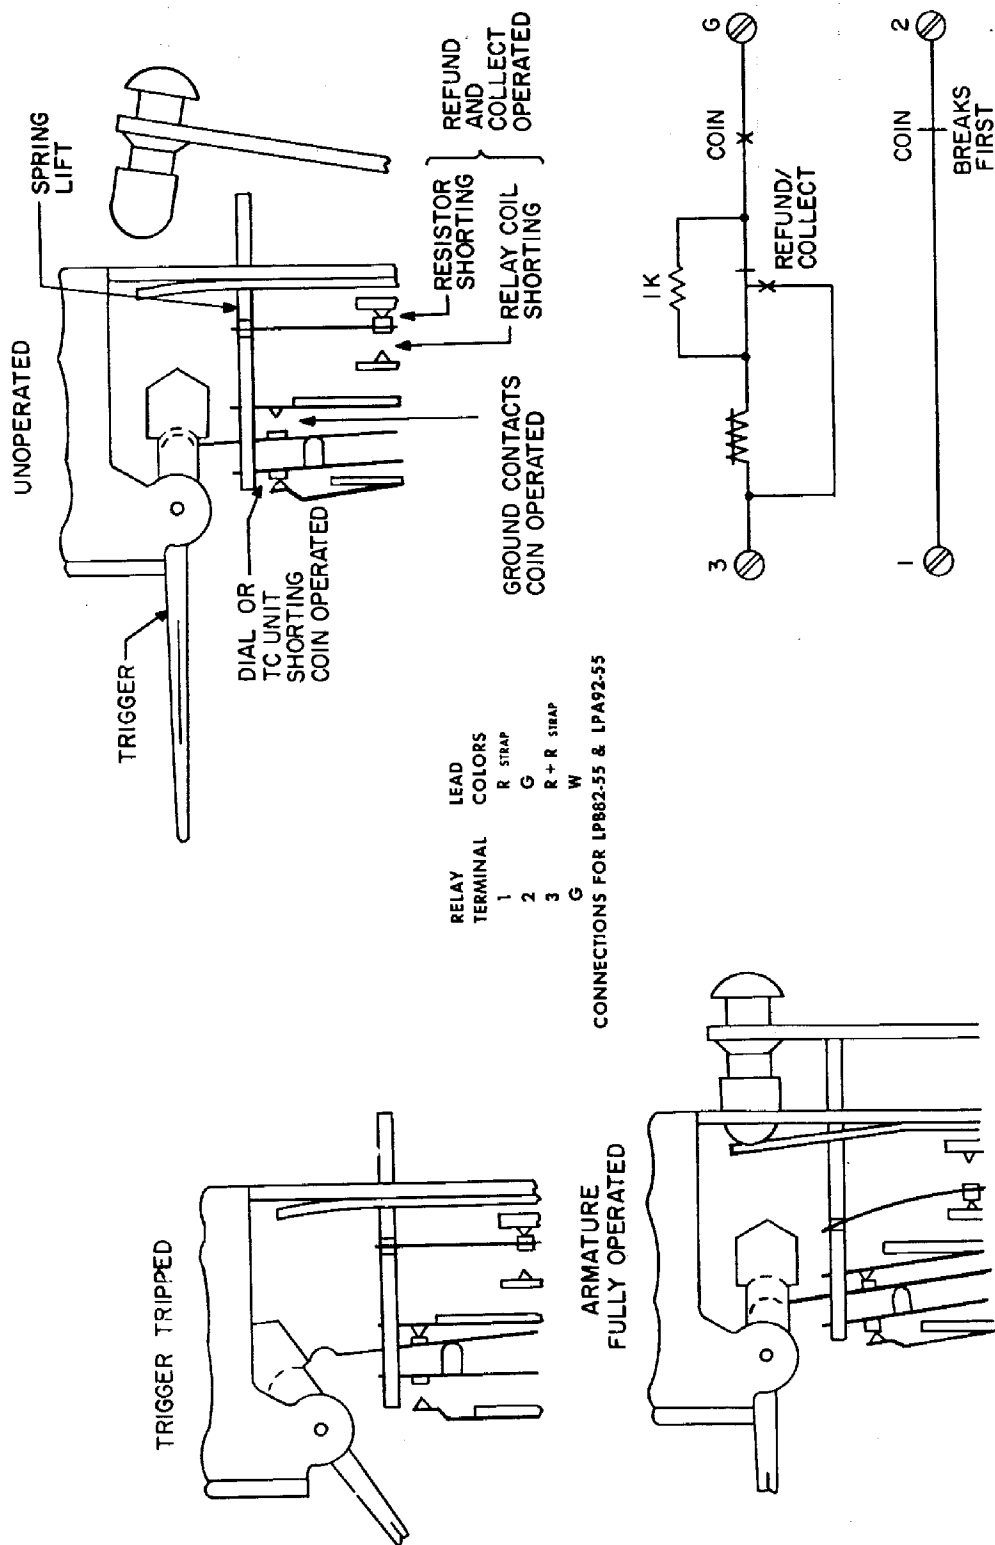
Coin Relay Contact Spring Assembly and Schematic.
